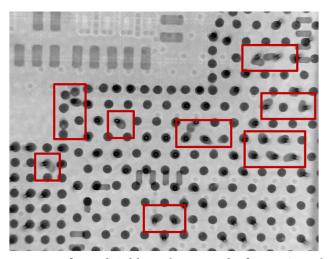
Deformed Solder Joints Found After ATC Testing with Solder Joint Encapsulant Material B
